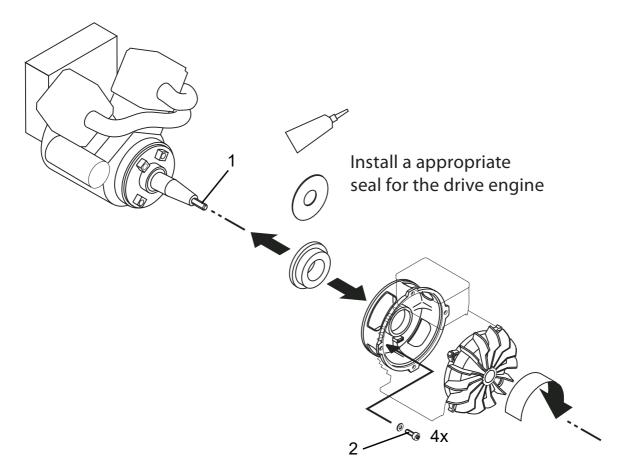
Assembly of single-bearing brush generators on the drive motor
